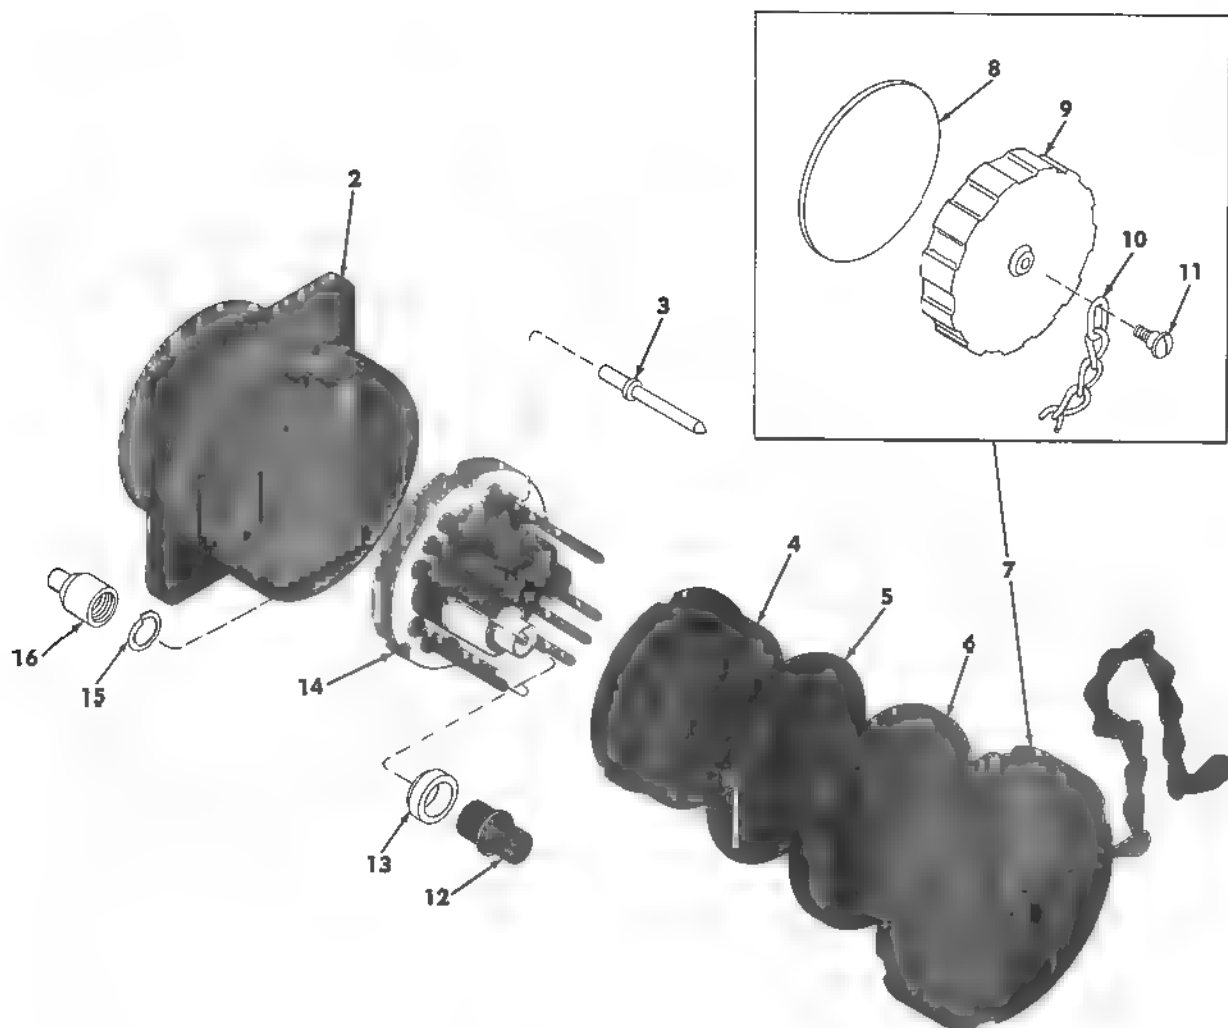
CONNECTOR, RECEPTACLE, ELECTRICAL /7632529/-EXPLODED VIEW
